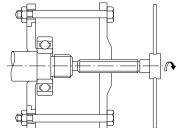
Removal of Inner Ring Using Withdrawal Tool (1)
